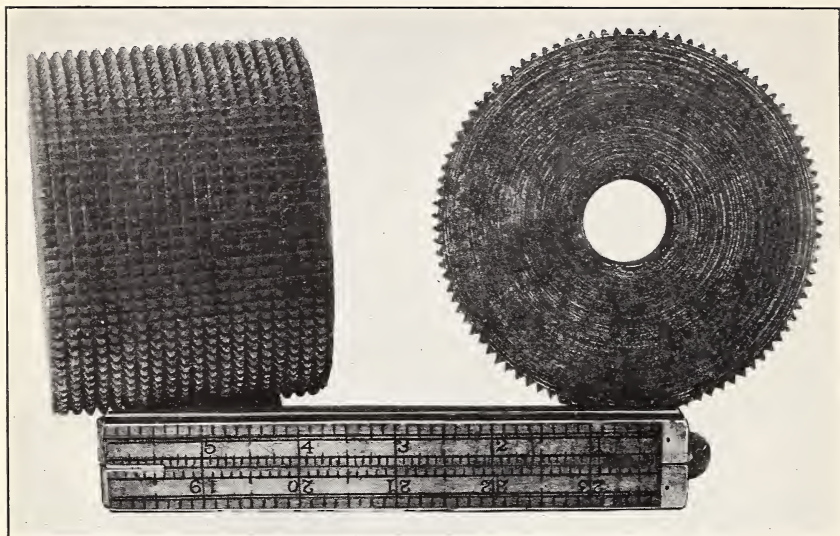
DIAMOND-POINT BURR, EIGHT TO THE INCH.
